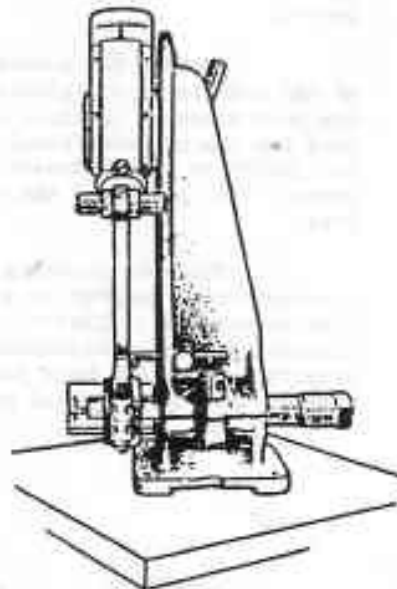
CHECKING CON-ROD ALIGNMENT.
